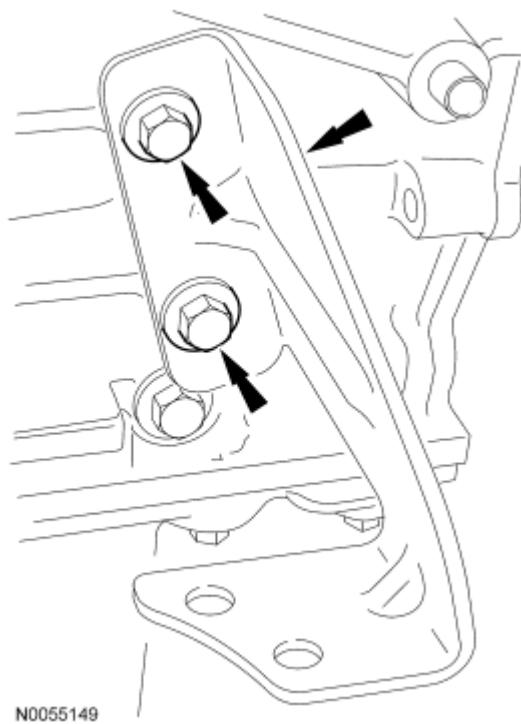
Locating Catalytic Converter Bracket & Bolts
